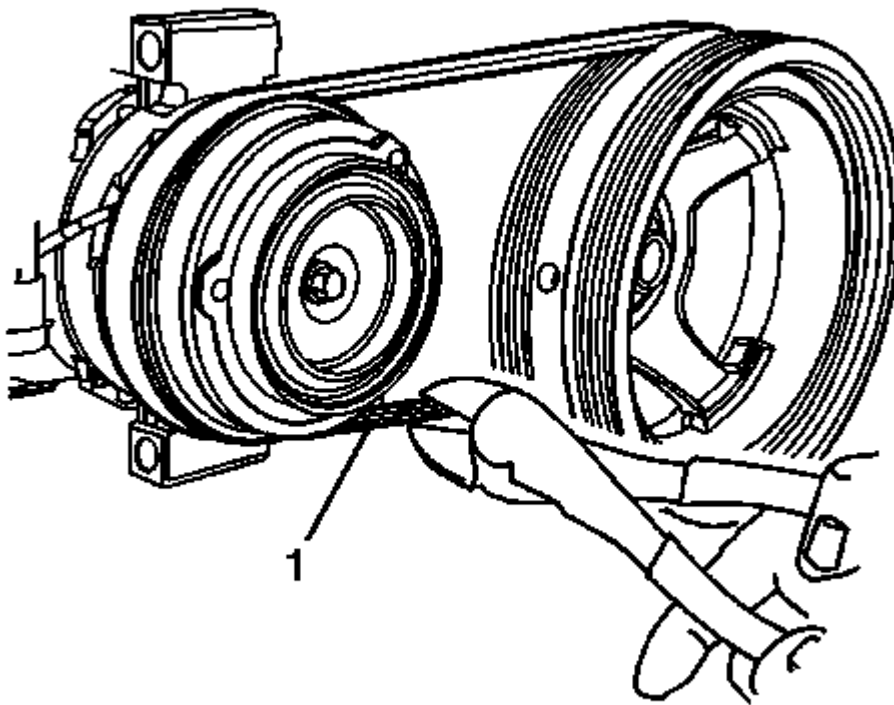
Drive Belt RoutingCourtesy of GENERAL MOTORS COMPANY
